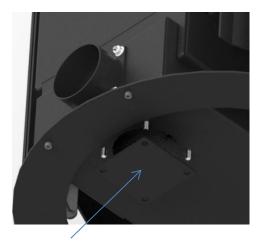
Rear view of the equipment; placement of the outside air inlet kit
